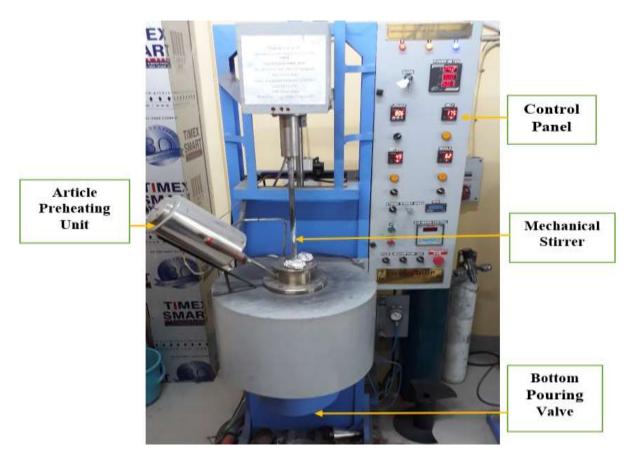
Bottom Poured Stir Casting Resistance Furnace [Courtesy Smart Foundry Lab: JU]
